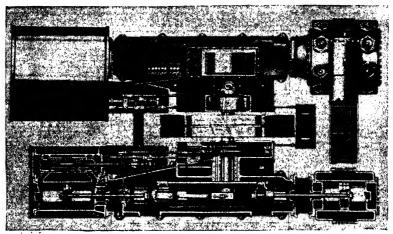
Plan view of a steam-driven two-stage compressor showing stretcher rods. (Courtesy of Ingersoll-Rand Co.)
